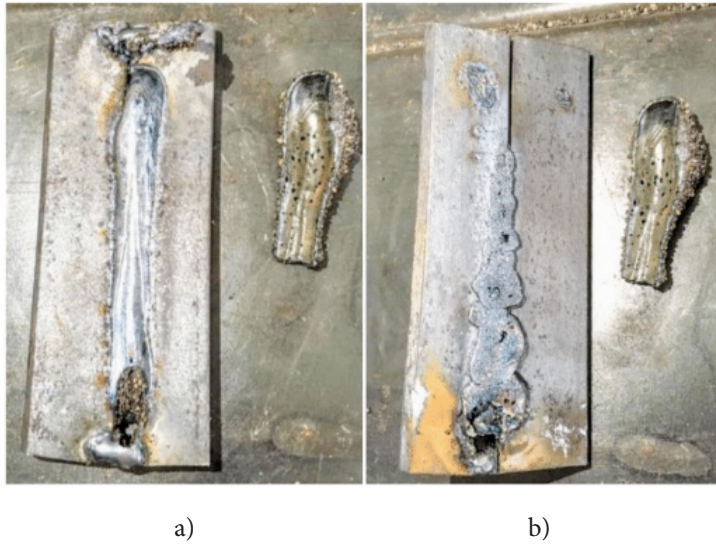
Welding on the plate 600 A –5 a) no scum b) background of the piece
